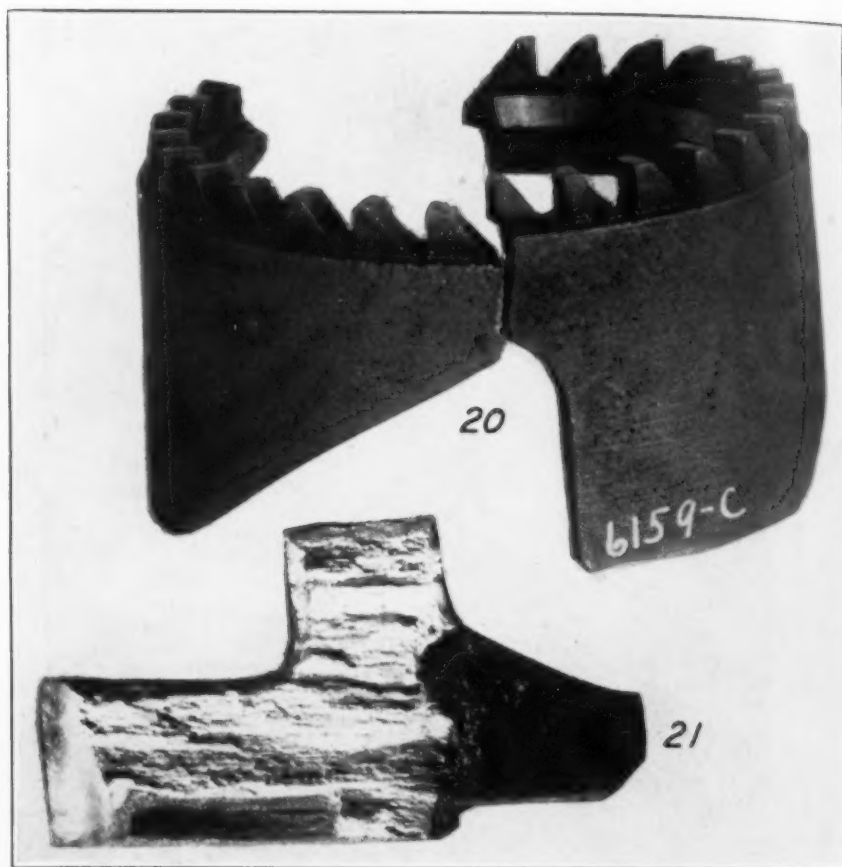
Photograph of Hand Starter Release Showing Location of Fracture, $\times 1\frac{1}{2}$. Fig. 21—Photograph Showing Appearance of Fracture of Hand Starter Release, $\times 6$.
